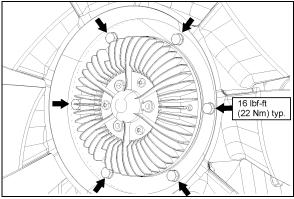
RADIATOR FAN MOUNTING BOLTS
